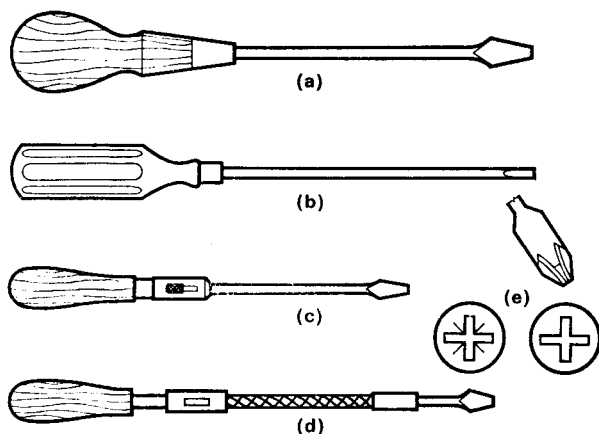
(a) Screwdriver with spade blade. (b) Plastic handled screwdriver with flat blade. (c) Ratchet screwdriver. (d) Spiral ratchet screwdriver with interchangeable bits. (e) Cross-head screwdriver for Phillips and Posidrive screws.
